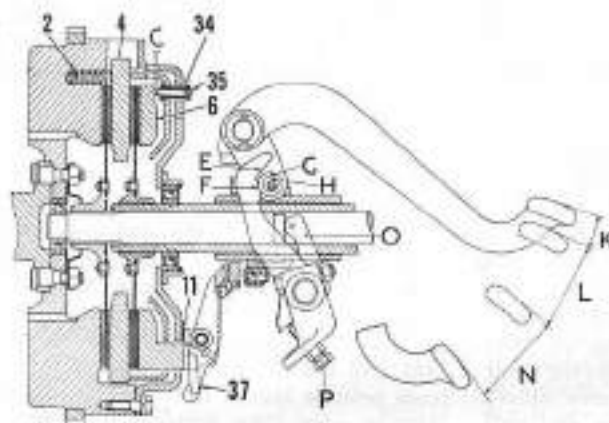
Cross-sectional view showing typical construction of all dual clutches. View also shows linkage adjusting points for models 880, 990 and 4600; refer to paragraph 132 for adjustment procedure. In operation, transmission clutch pressure plate (6) is released first, then it contacts inner cover adjusting screws (35) releasing the PTO clutch pressure plate (separator plate) (4).
